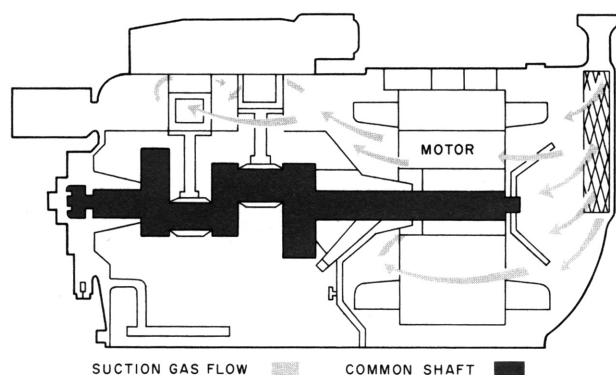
CUTAWAY VIEW OF HERMETIC COMPRESSOR
